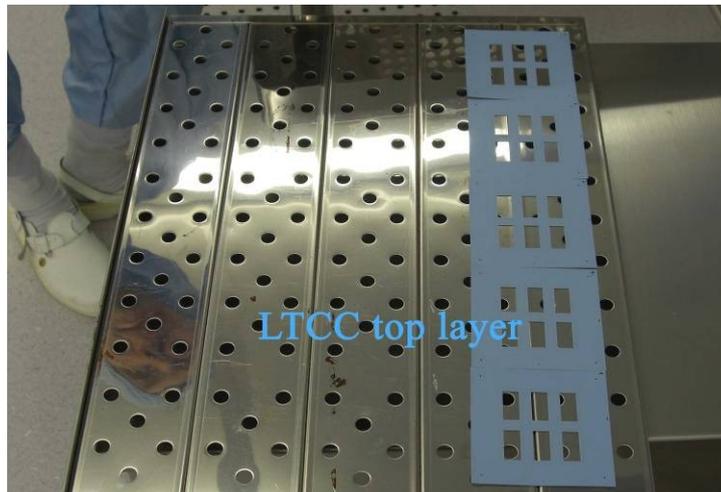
Star-Oddi package version 2.0, LTCC package is designed and the fabrication is in progress. It replaces the first prototype.
